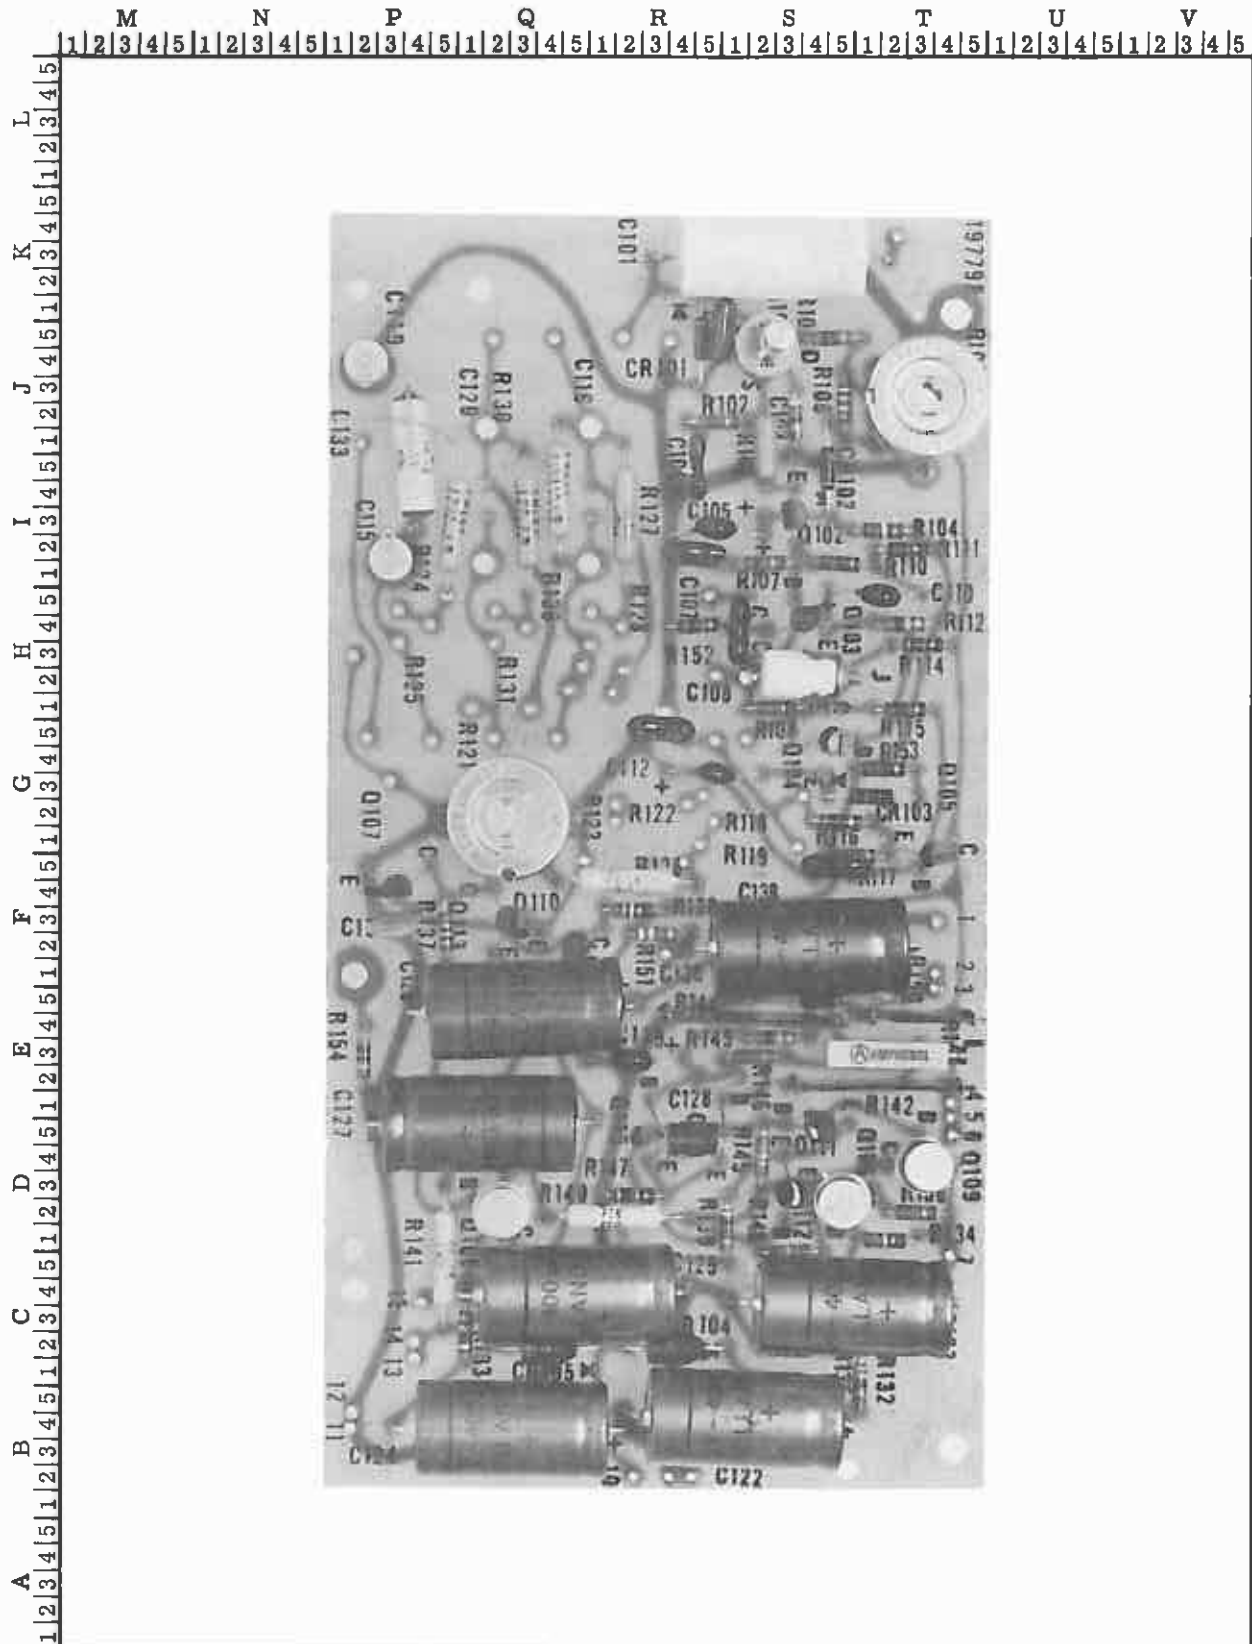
INPUT AMPLIFIER AND POWER SUPPLY ASSEMBLY (Sheet 1 of 2)
